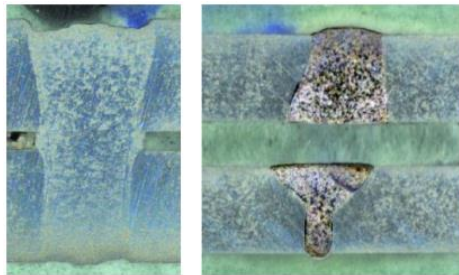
Cross section of an overlap weld with fusion (*left*) and missing fusion (*right*), in case of a sheet configuration exceeding the permissible gap height.
